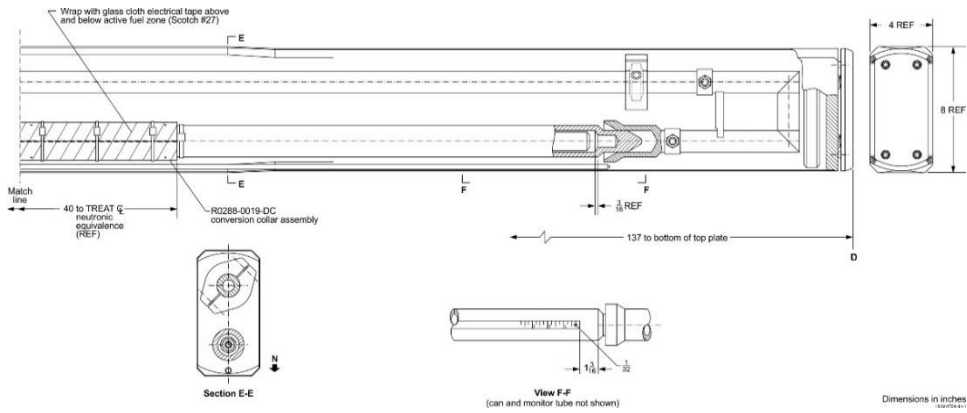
M2/M3CAL Assembly (Bottom) (DWG# R0288-0004) [1].
